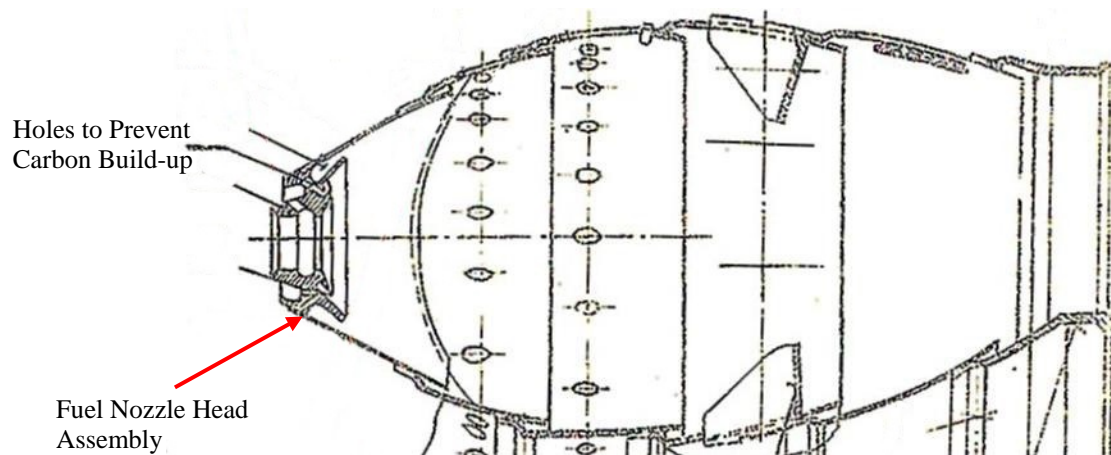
Combustion Chamber Flame Tube – Section Schematic
